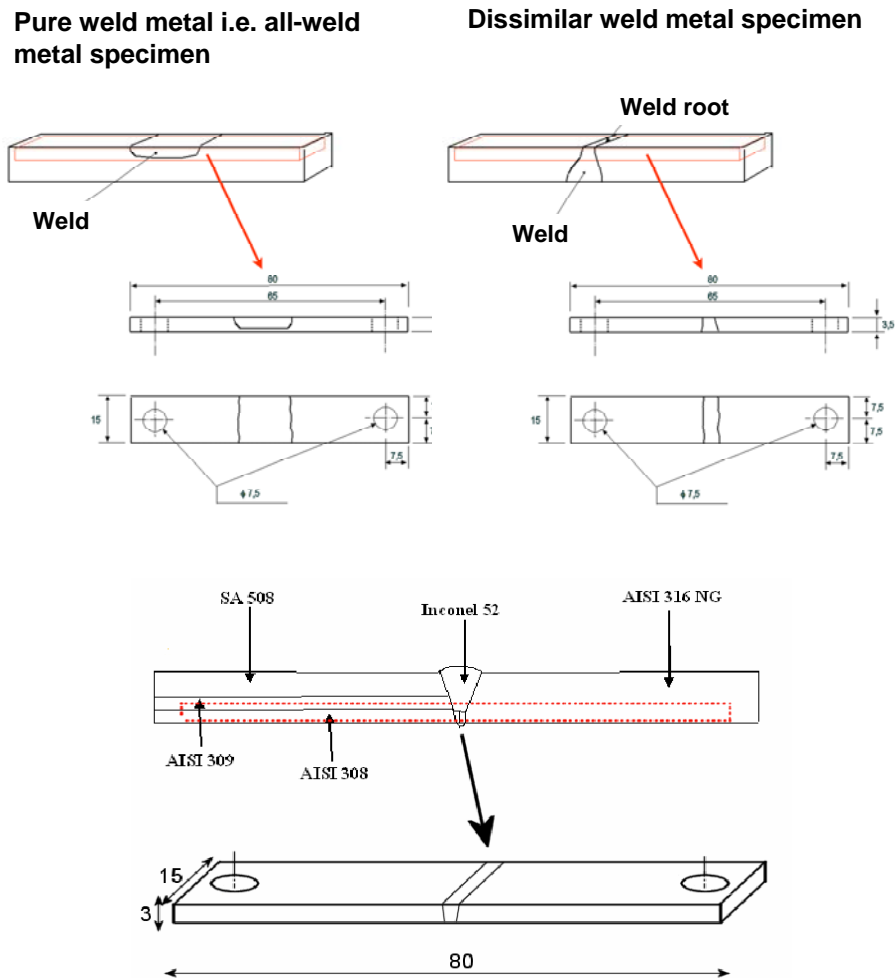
Schematic EAC specimen cutting location (transverse orientation) and specimen dimensions.
